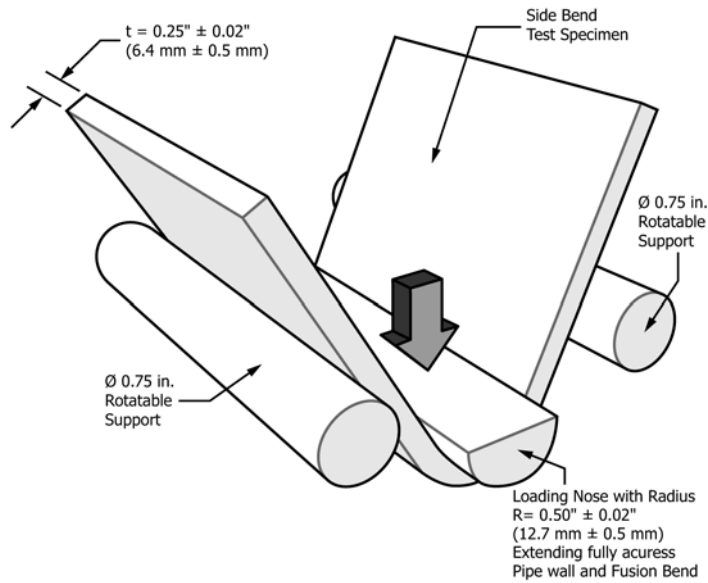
Three Dimensional Schematic of Side Bend Apparatus
